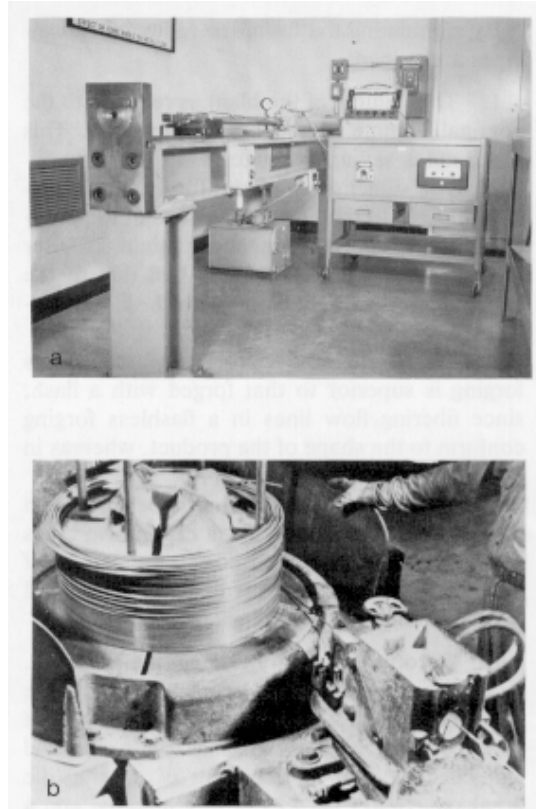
A drawbench (a) and a bull block (b) for wire drawing.
